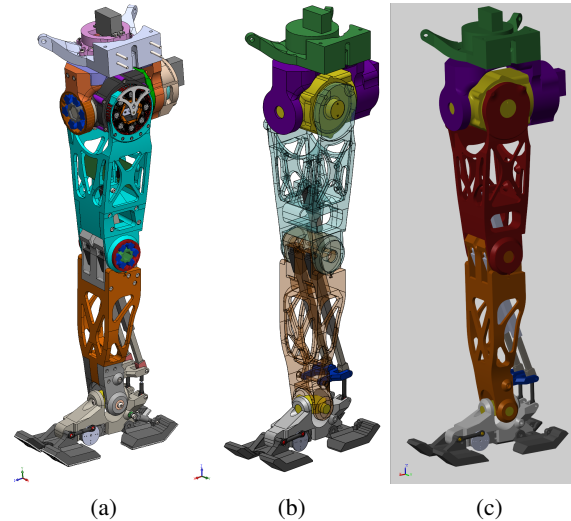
(a) Detailed Solidworks Design, (b) Mock-up Solidworks Design, (c) Mock-up Simulink Mechanics Explorer
